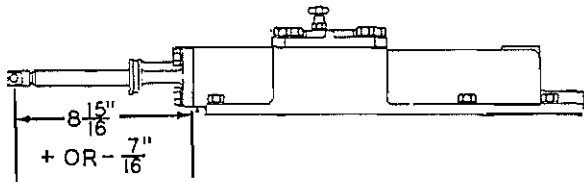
A -- Spool Valve "Standout" Dimension (T-41915)
